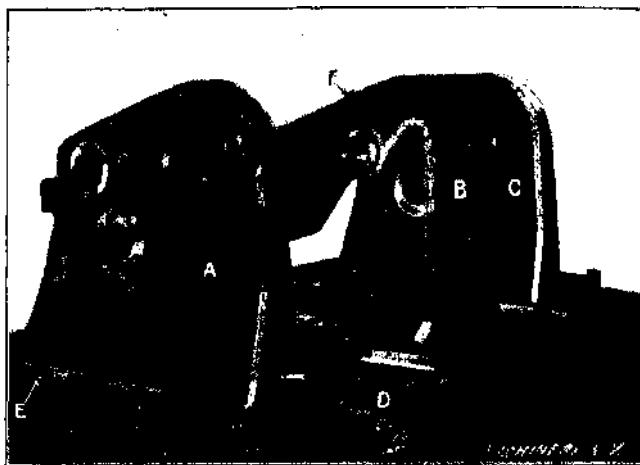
Boring Jig consisting of Baseplate and Separate Removable Uprights carrying th© Guide Bushings
